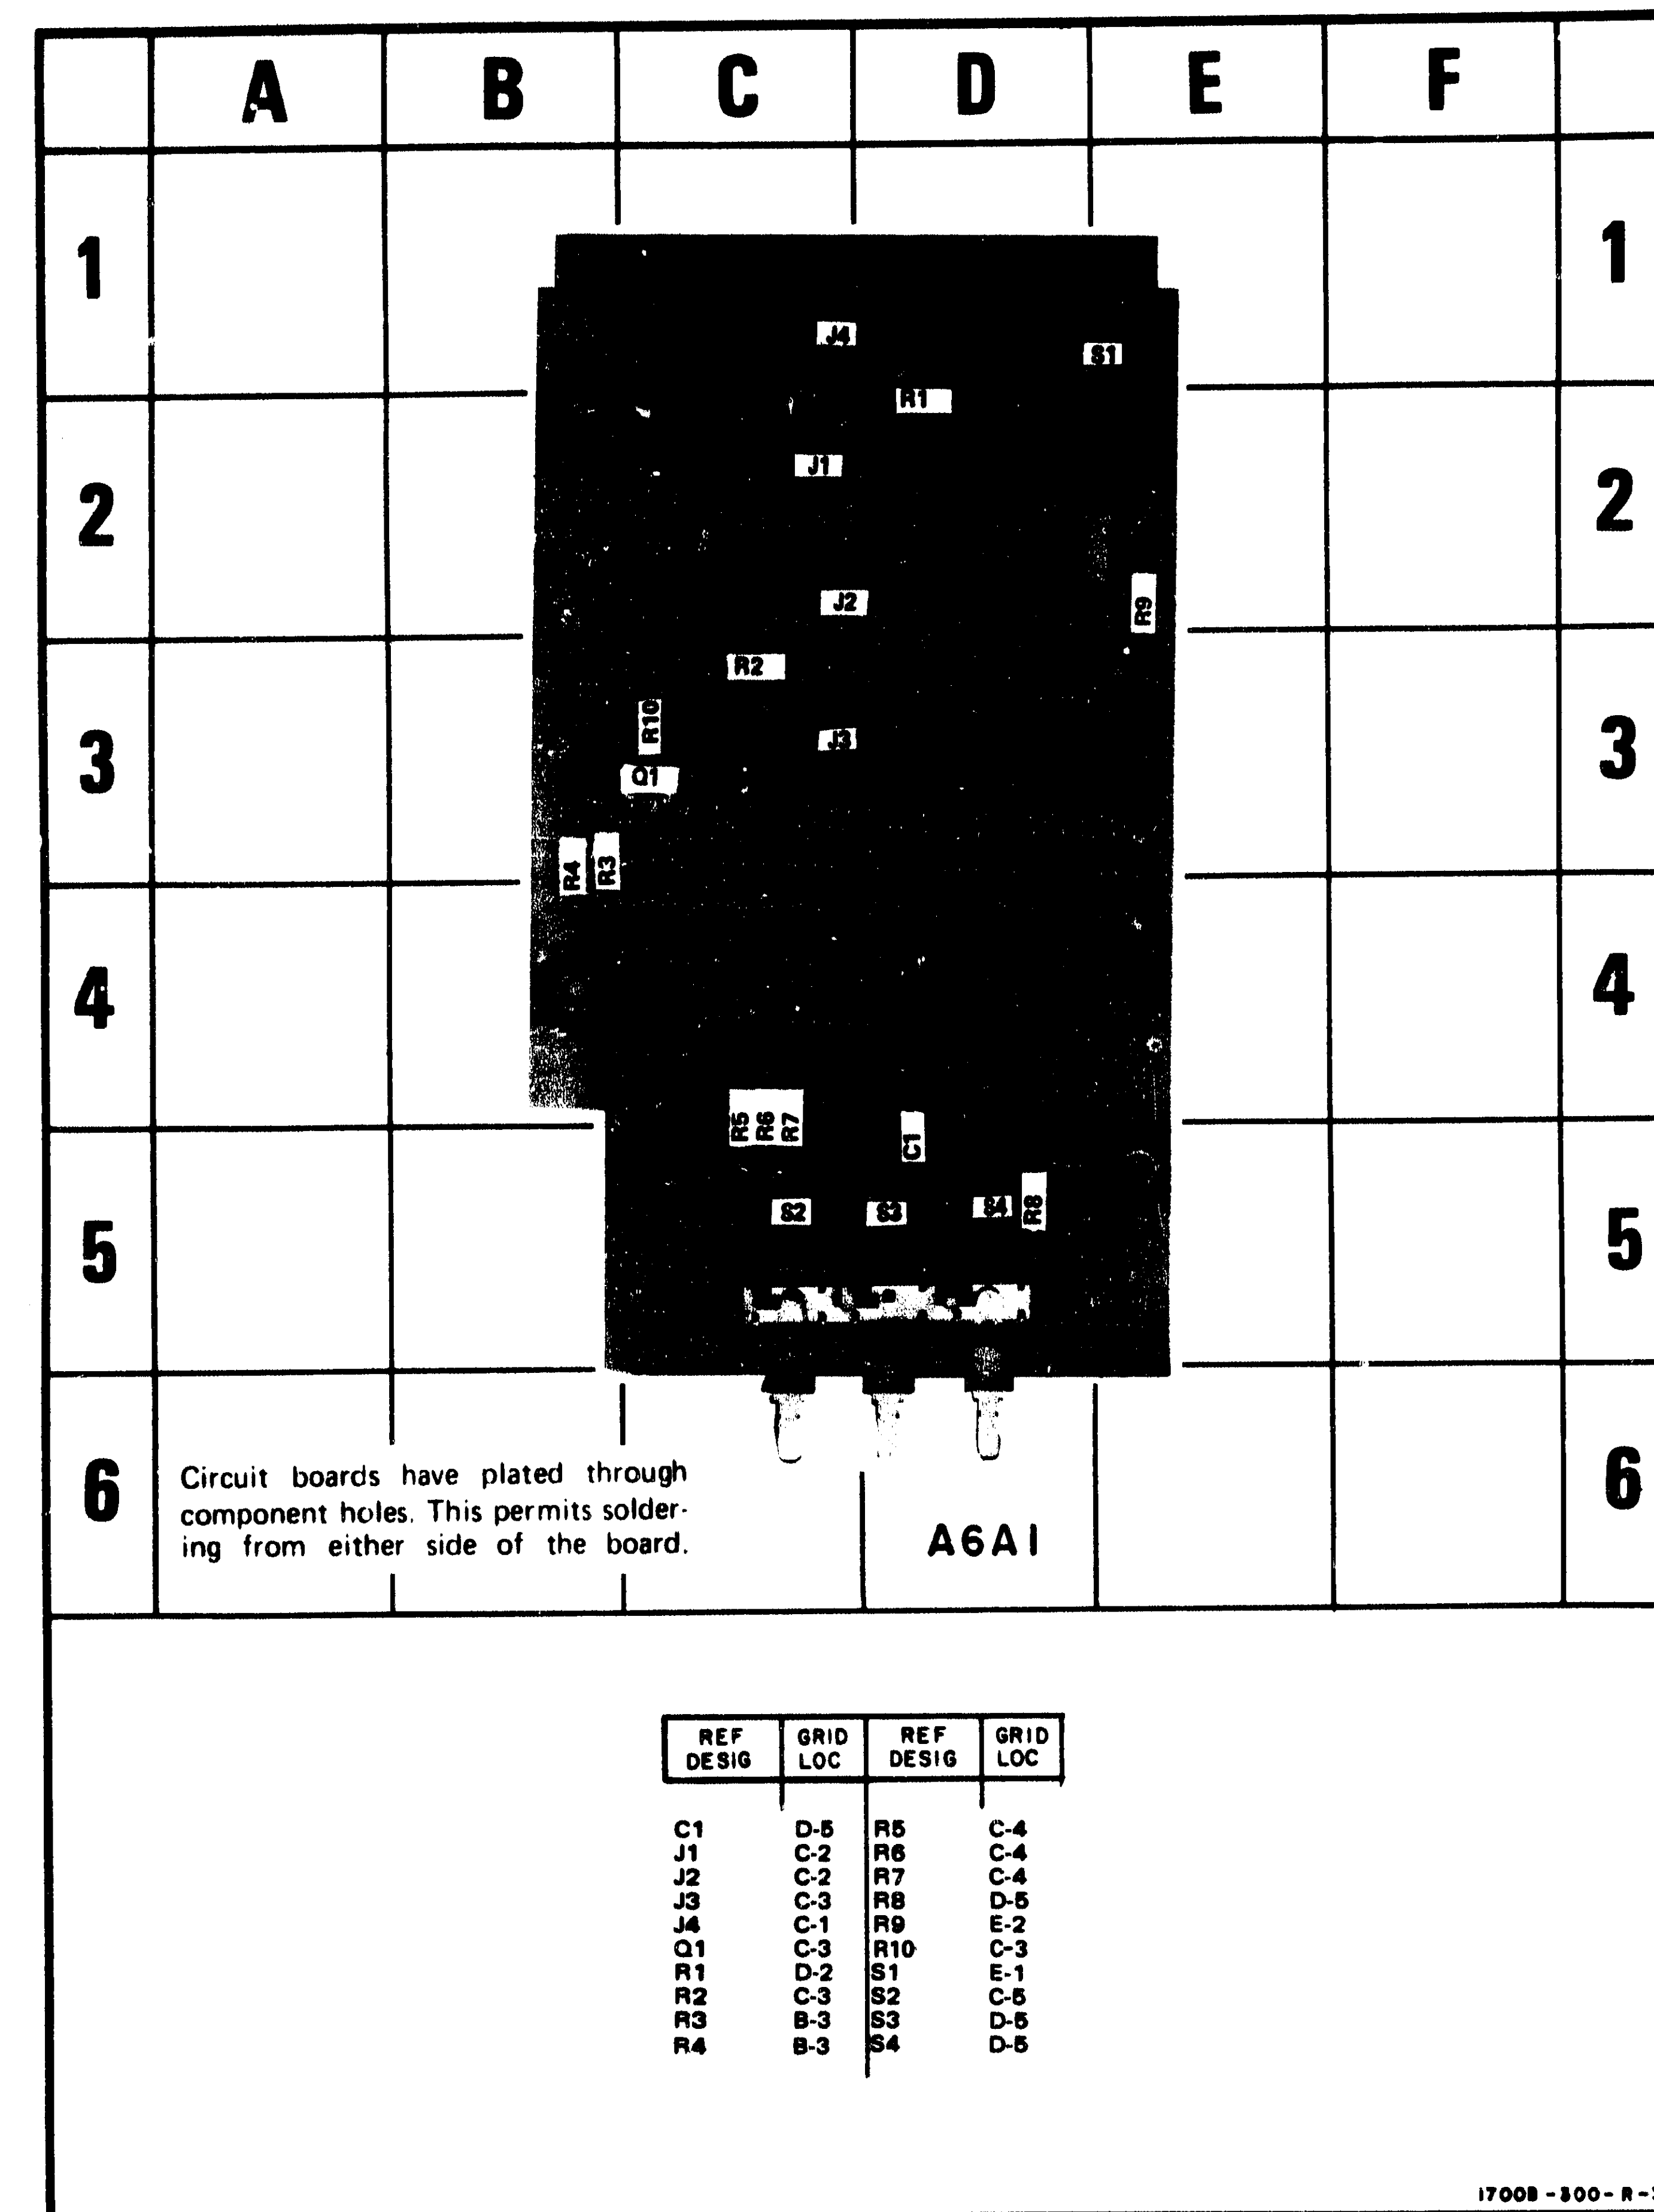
Horizontal Mother Board, A6A1, Component Identification
